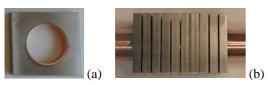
A test mock-up consisting of W monoblocks and a CuCrZr tube joined via a functionally graded thin W/Cu bond coat $(17 \mu m \text{ thick})$ manufactured by an industrial process.
